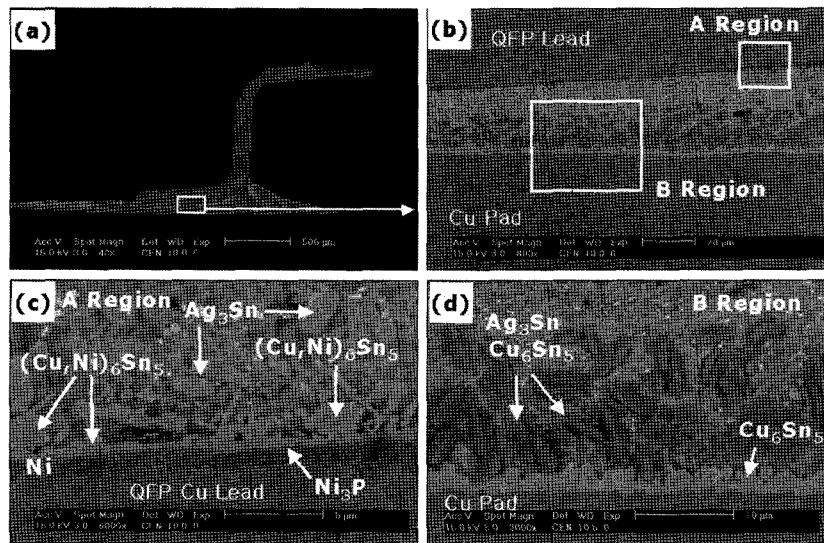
Cross section images of 44 pin QFP soldered with Sn-3.0 Ag-0.5 Cu after thermal shock test, 2,000 cycles: (a) overall shape of solder joint, (b) magnified view of solder joint, (c) microstructure of QFP lead side and (d) microstructure of Cu pad side.
